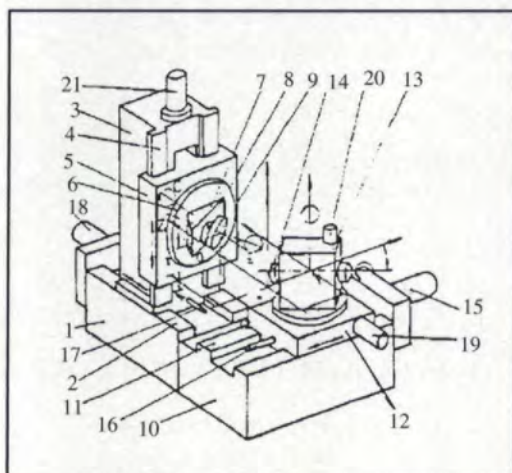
Modul machine with CNC-controlled X-Y cradle.
